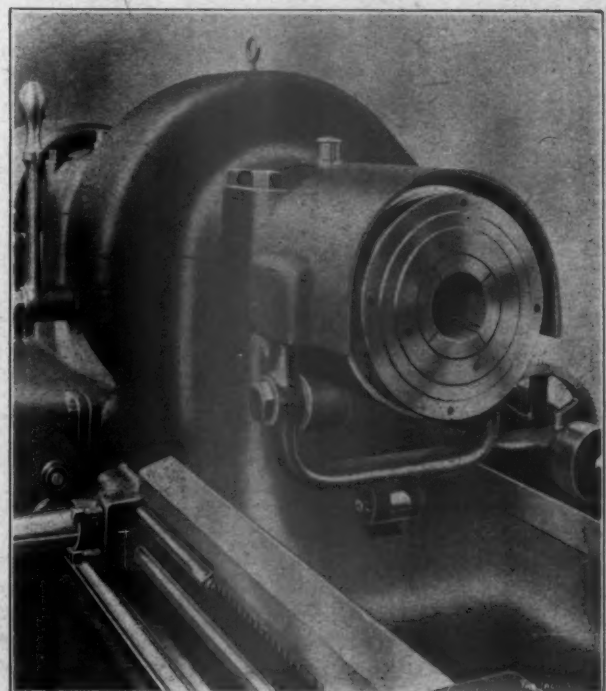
SPINDLE END AND AUTOMATIC CHUCK.
